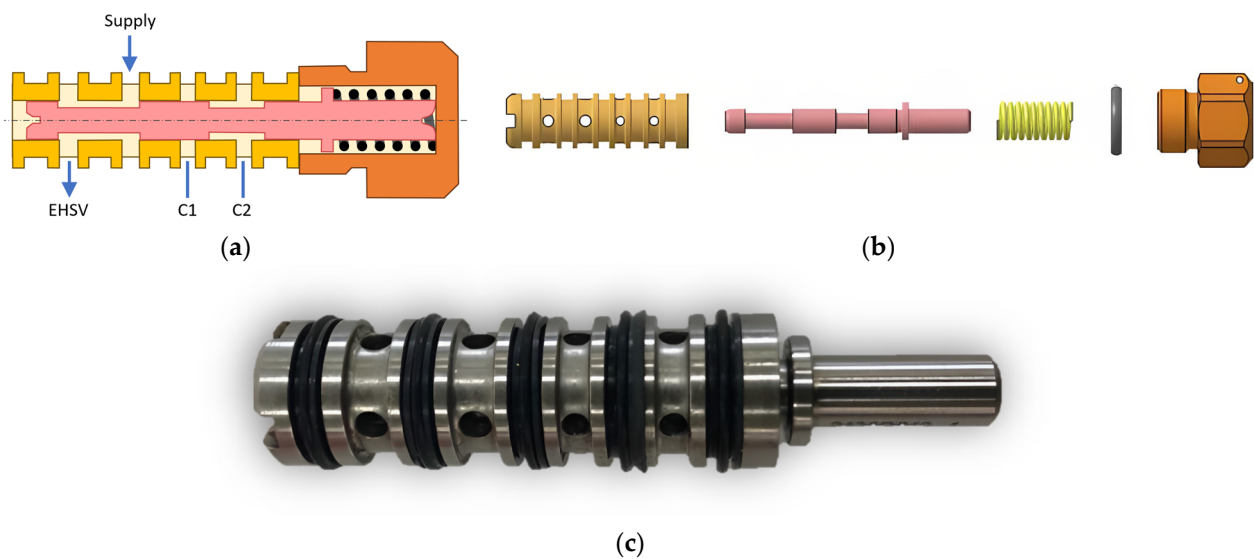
Bypass valve: (a) schematic section, (b) exploded view, (c) real assembly of the valve.
